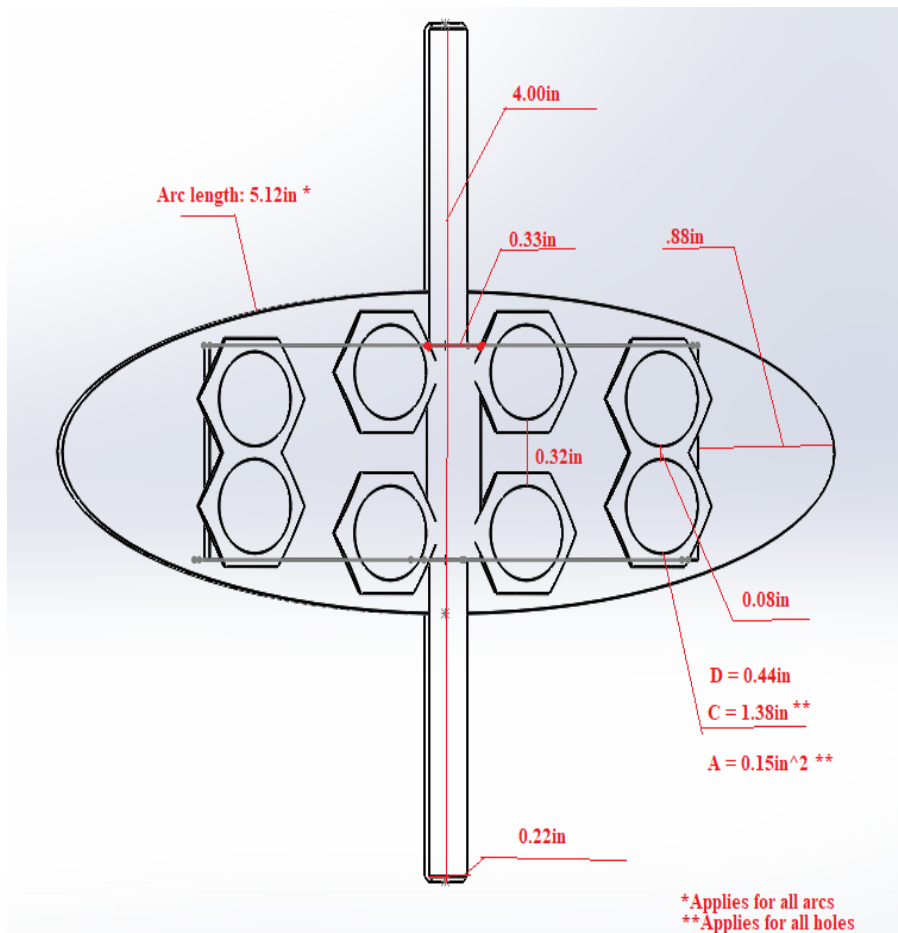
Top View of the Valve with dimensions and dimensions of hole locations
